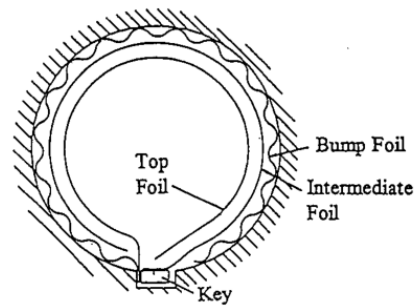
Reversed Multilayer Foil Journal Bear [6]
